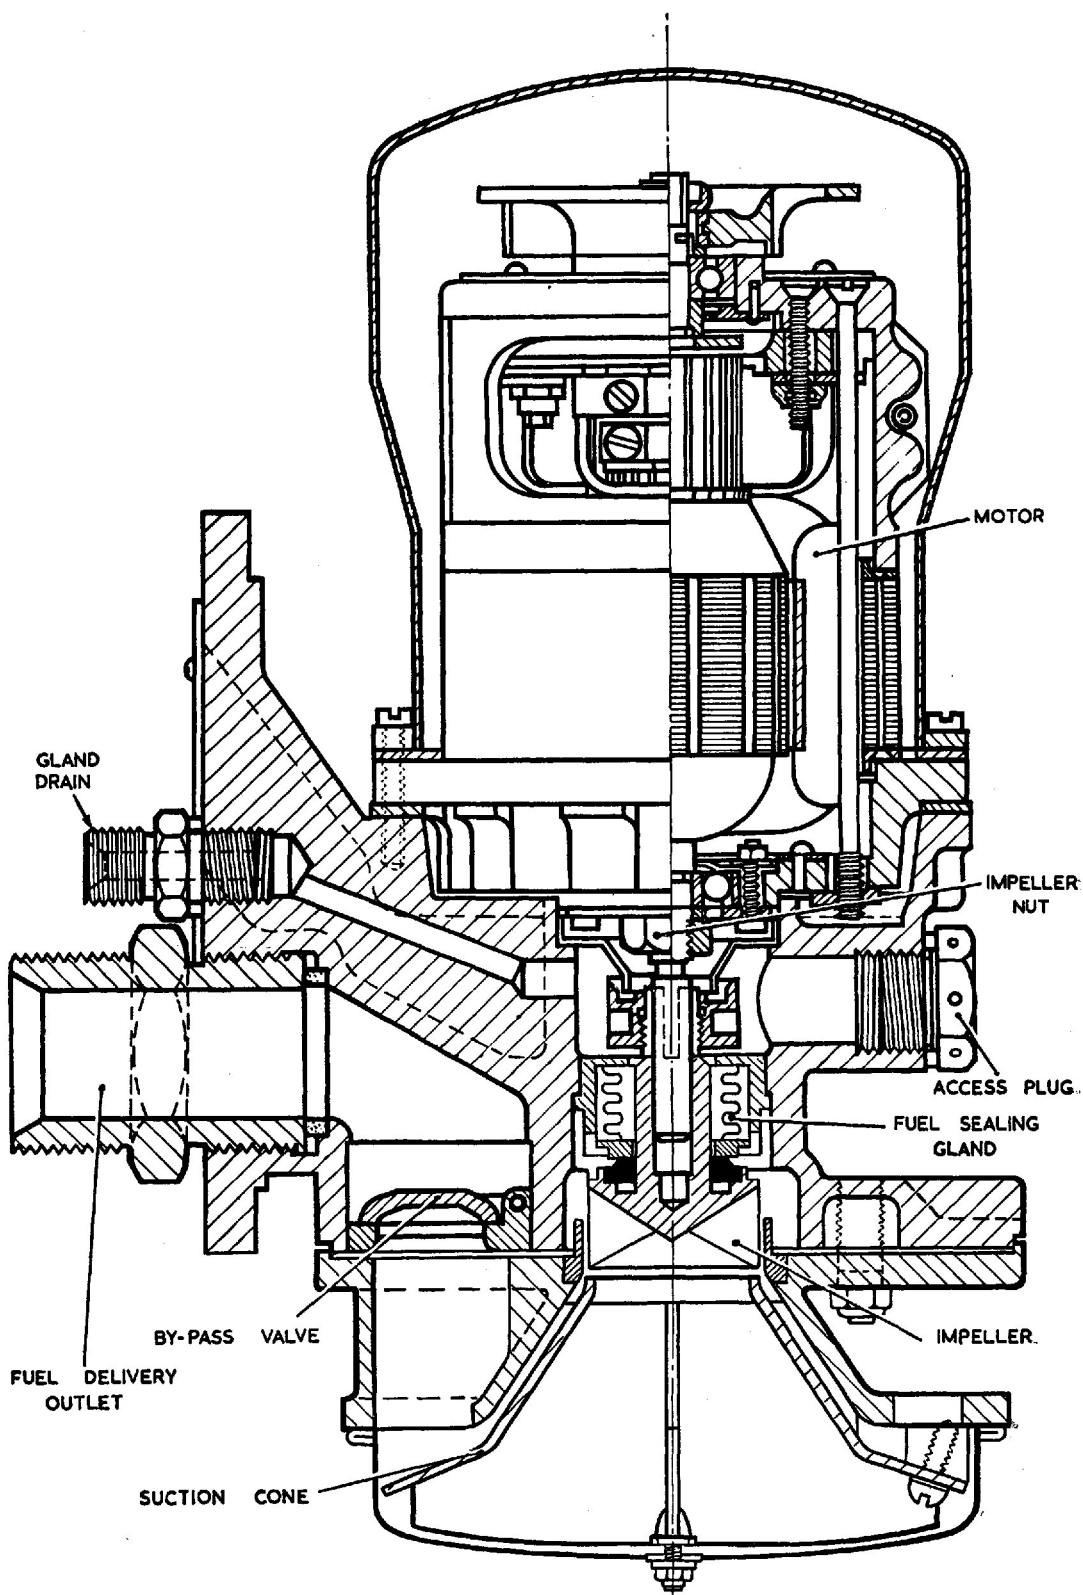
Part sectional view of FB 60, Mk. 5 fuel pump
